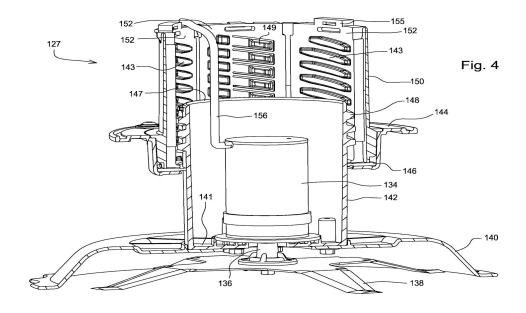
Cutting Height Adjustment Mechanism Patent
